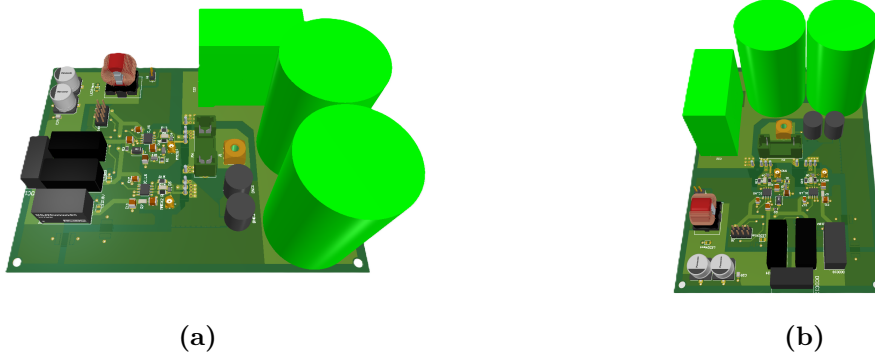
A three-dimensional illustration of the conventionally designed half-bridge converter PCB.
